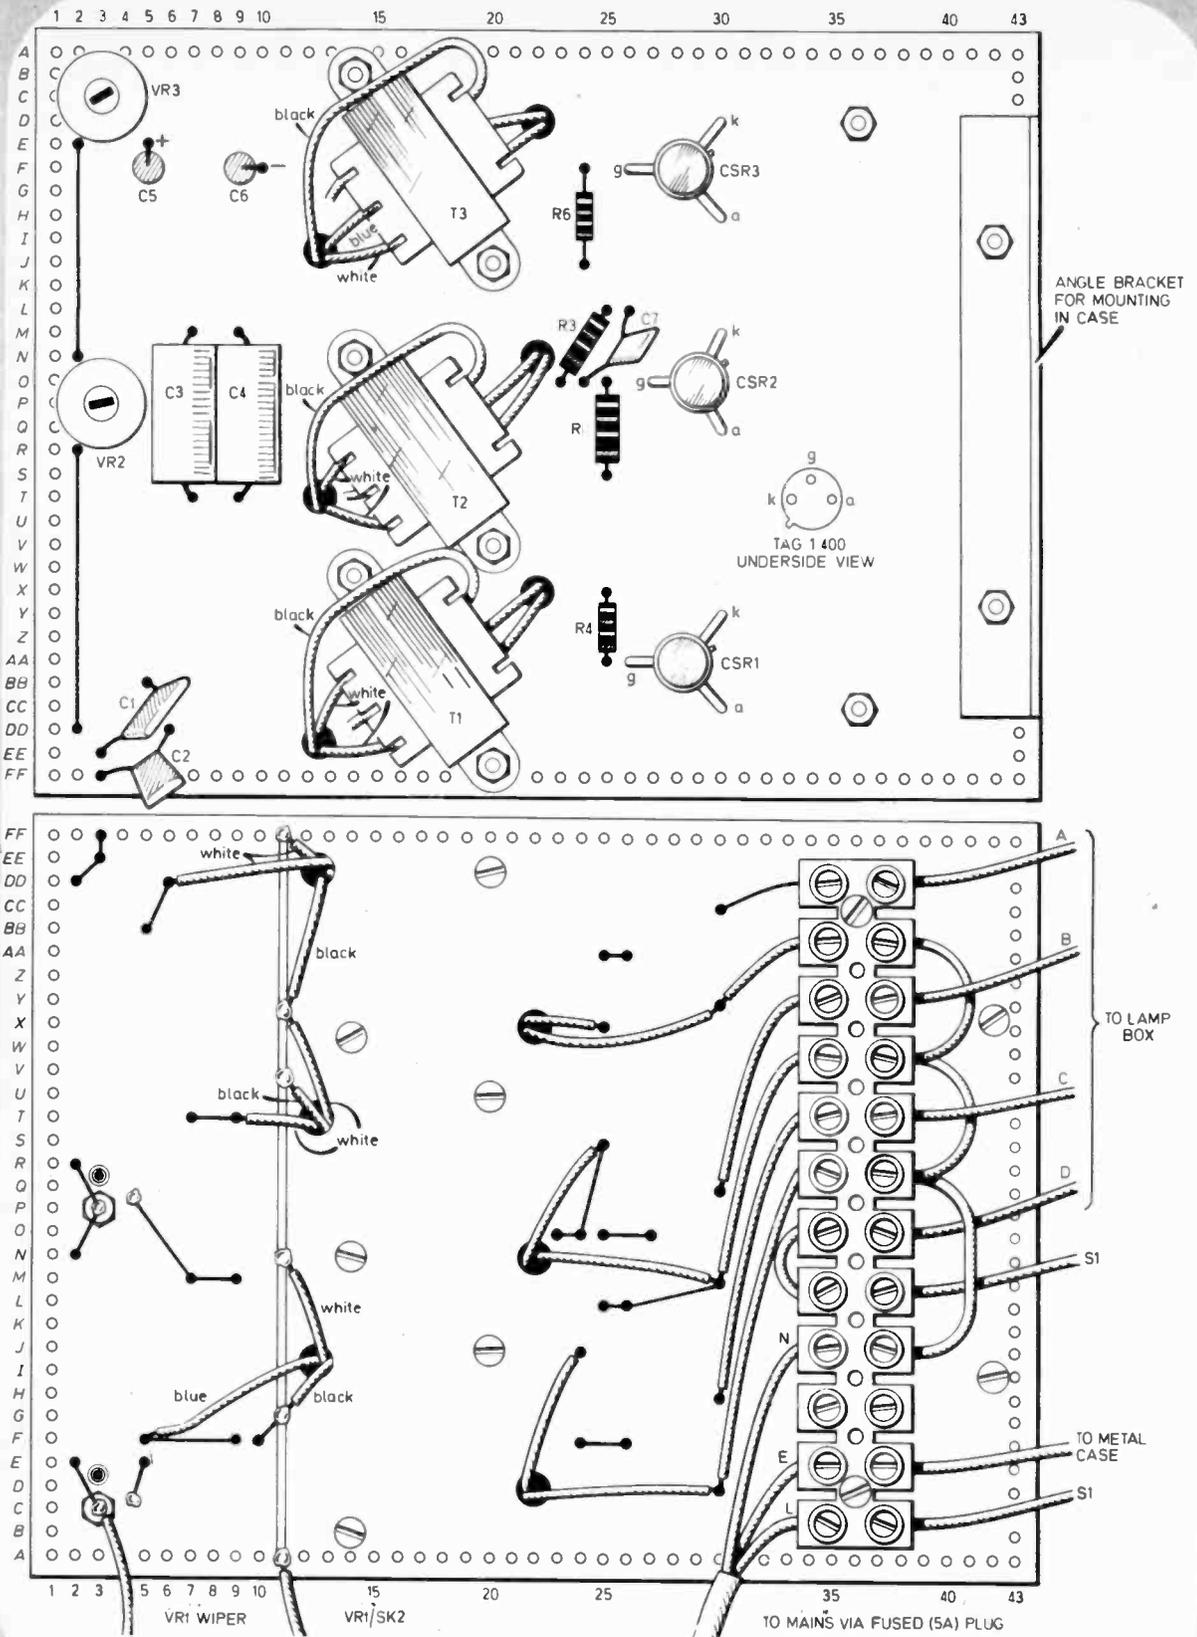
Layout and wiring of the complete circuit board. The spare wires from the transformers can be cut off as shown.
